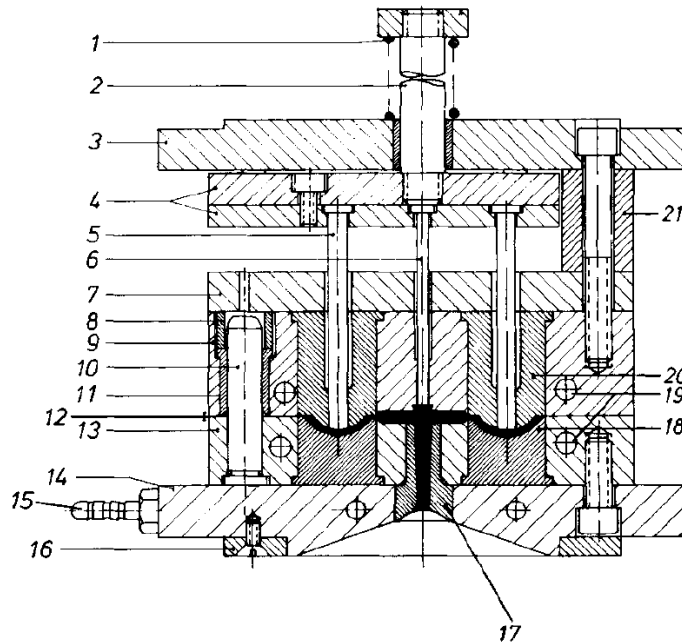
Scheme of the injection moulding mould [3] 1 – return spring; 2 – ejection pin; 3 – moving mounting flange; 4 – ejection brick; 5 – ejector; 6 – gate pusher; 7 – back-up plate; 8 – bearing sleeve; 9 – moving plate of moulding inserts; 10 – centre axis; 11 – centre sleeve; 12 – split line; 13 – motionless plate of mould inserts; 14 – immobile flange; 15 – cooling line connection; 16 – centre ring; 17 – gate sleeve; 18 – immobile insert; 19 – cooling channel; 20 – moving insert; 21 – beam.
